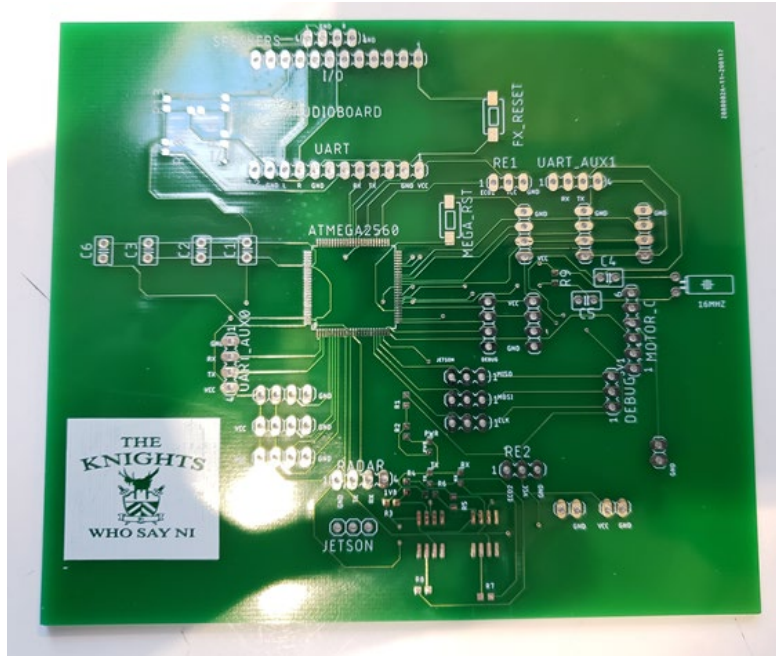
Sensor Board PCB Production Board (Unpopulated)
